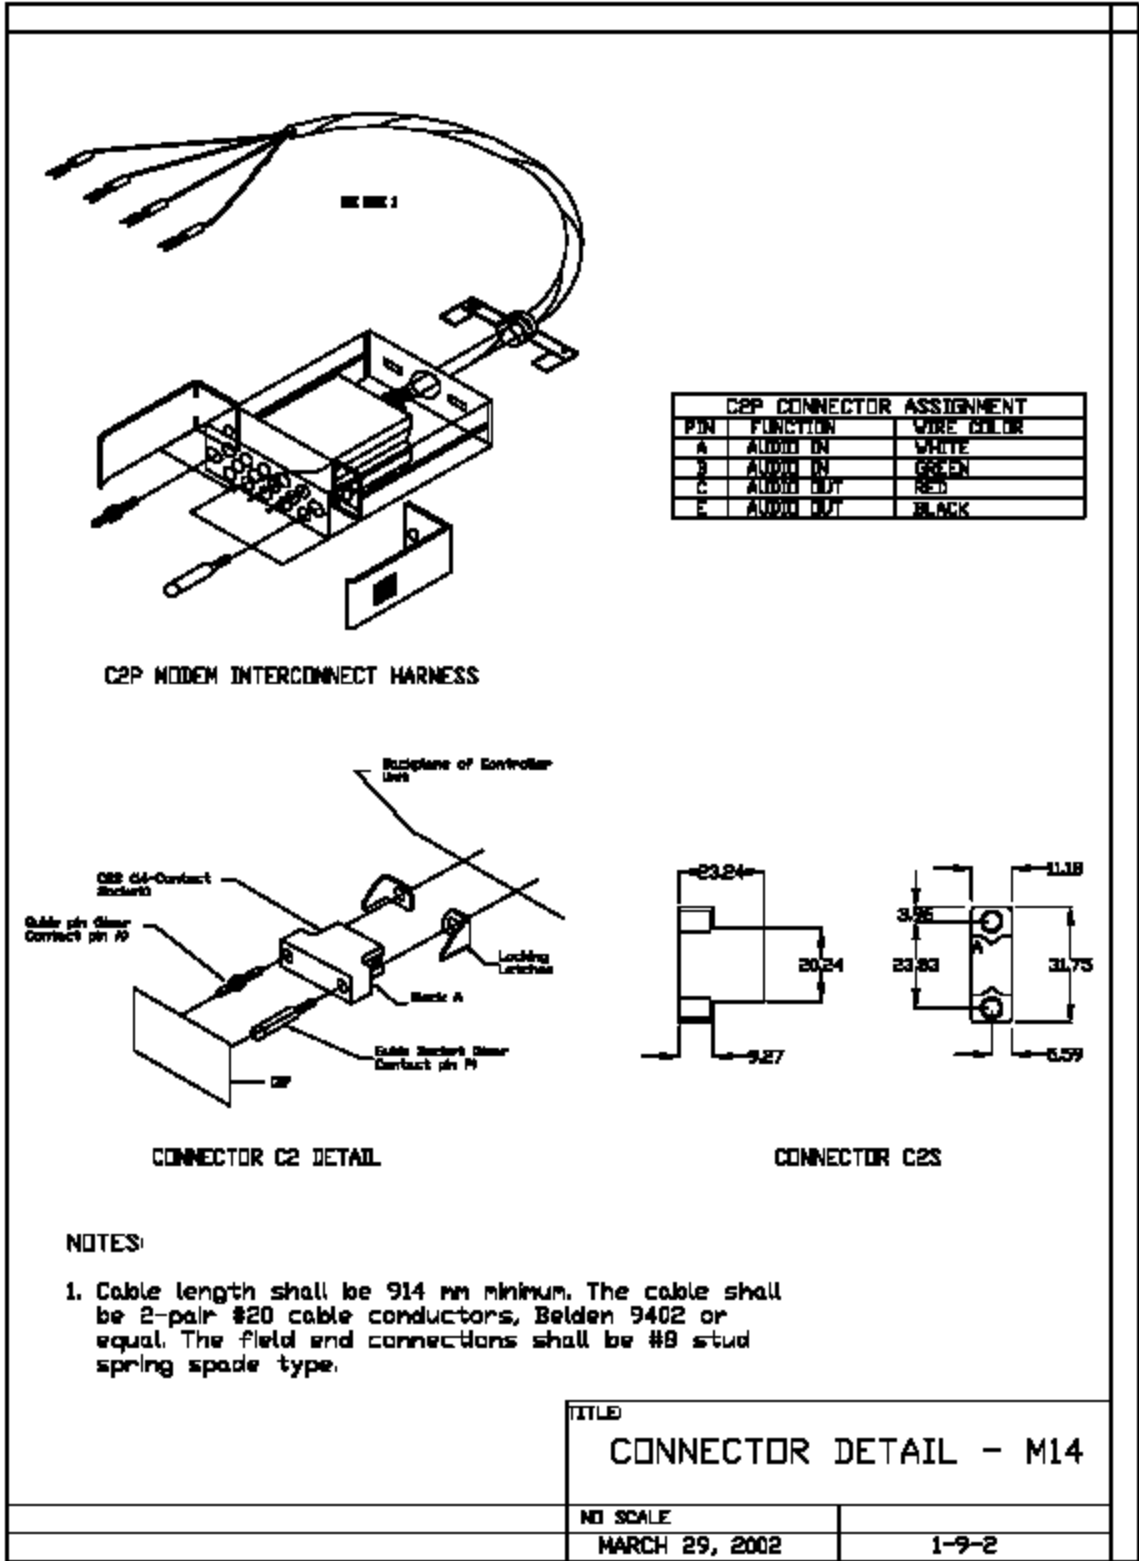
TEES DRAWING 1-9-2 Connector Detail - M14
